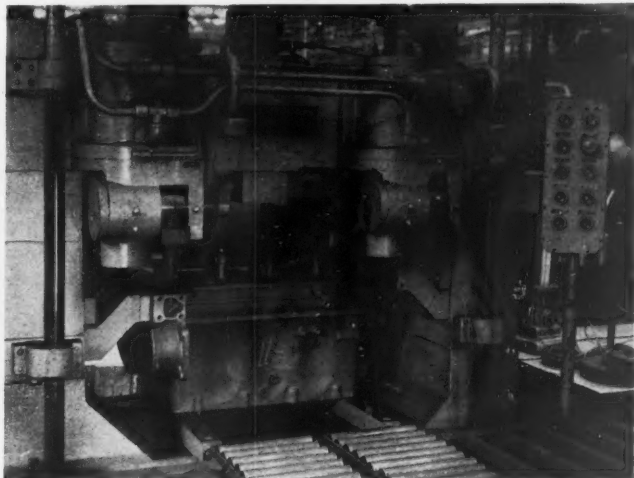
The cylinder block in the initial position on an Ex-cell-O machine for line boring main bearing and cam bores
